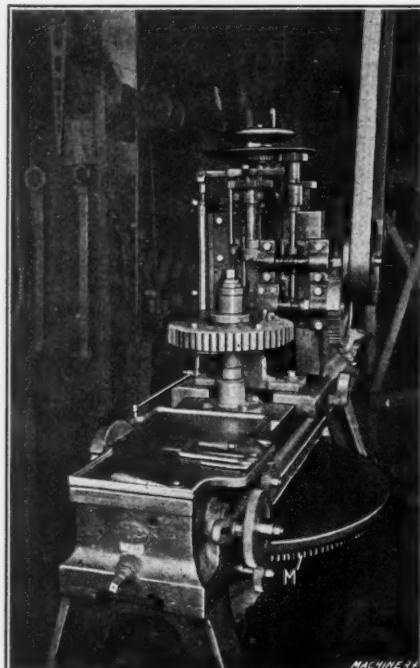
One of the Six Automatic Gear-cutting Machines built by R. Hoe & Co., patterned after the Freeland Machine
